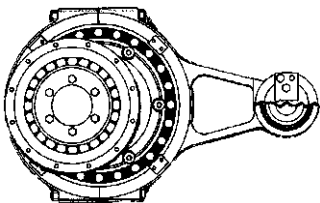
The main bearing mounted in a bearing holder (Gardner-Denver)
